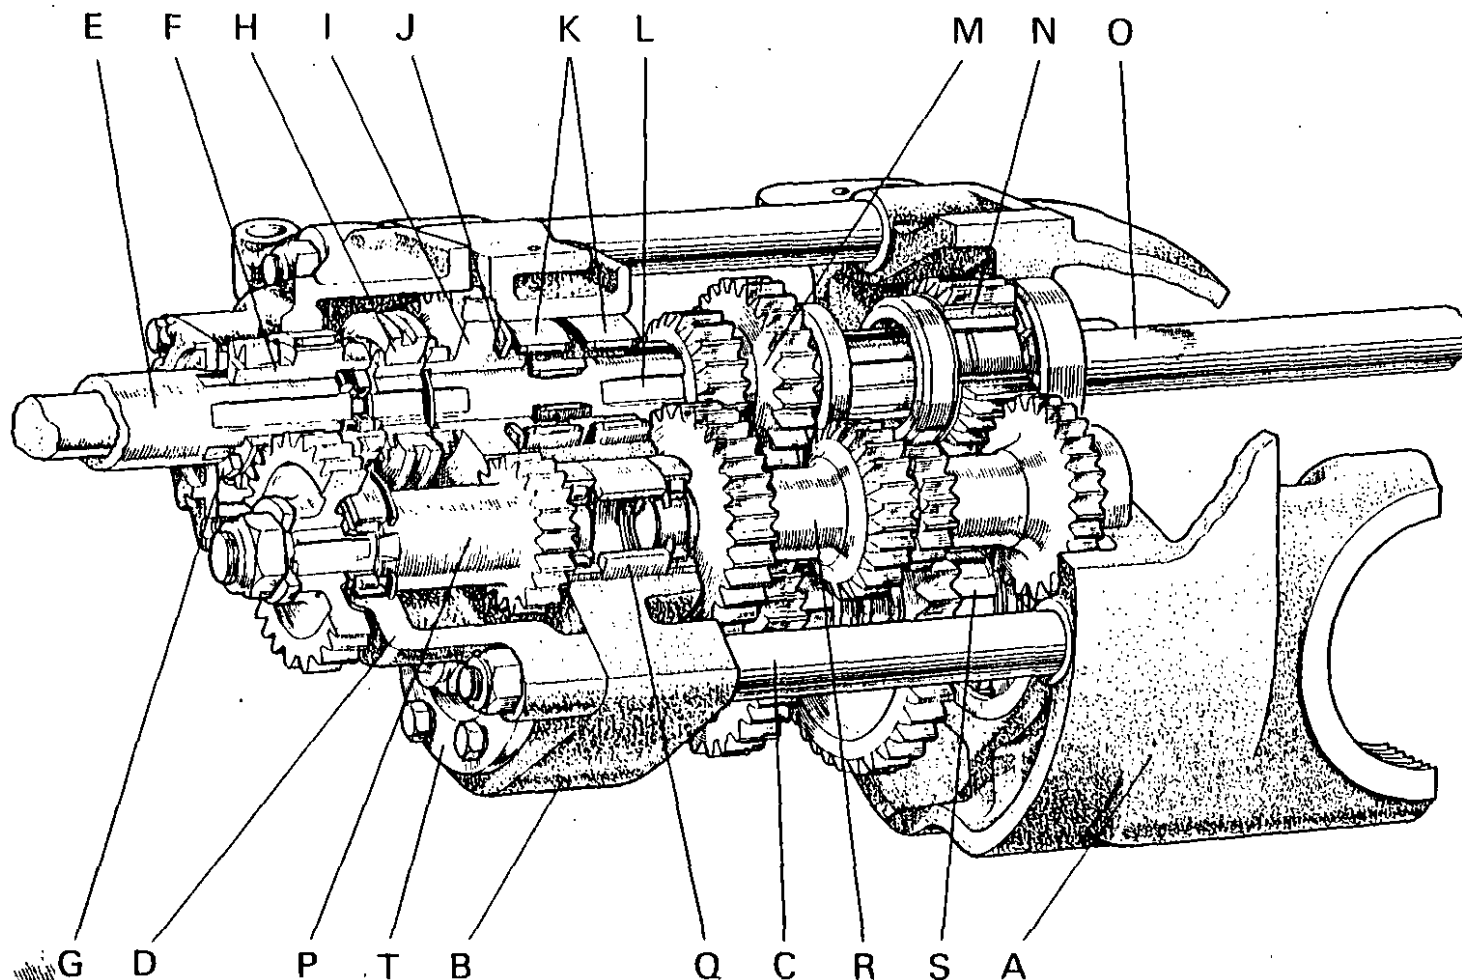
TWELVE-SPEED GEARBOX — 880/990 TRACTORS
